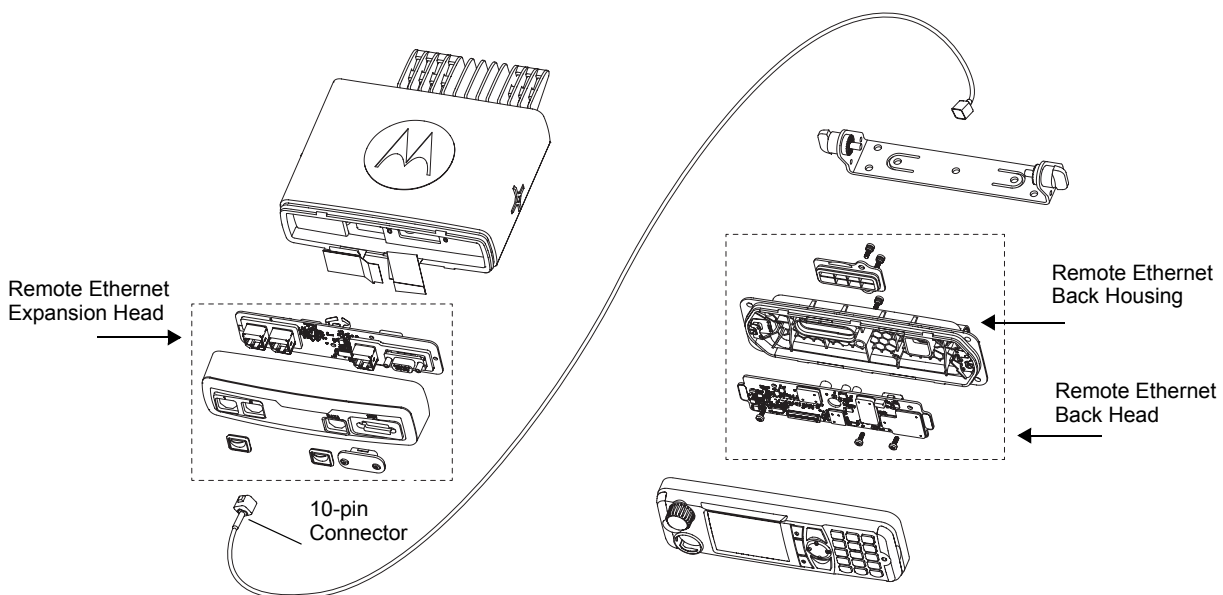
Remote Mount Ethernet Control Head with Remote Ethernet Expansion Head
